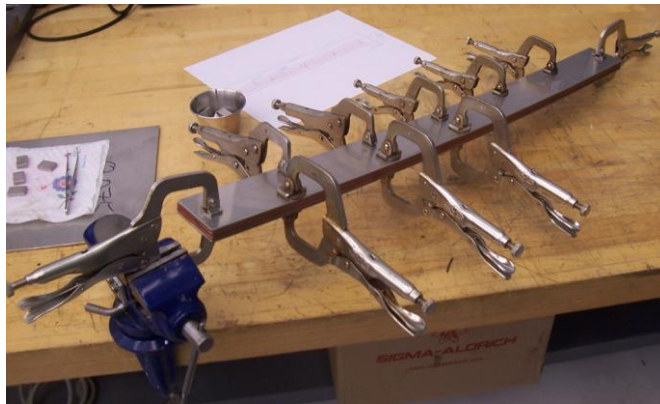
Stainless Steel and Copper Package. Textured stainless steel and copper foils are stacked and clamped to prepare for EDM cutting.
